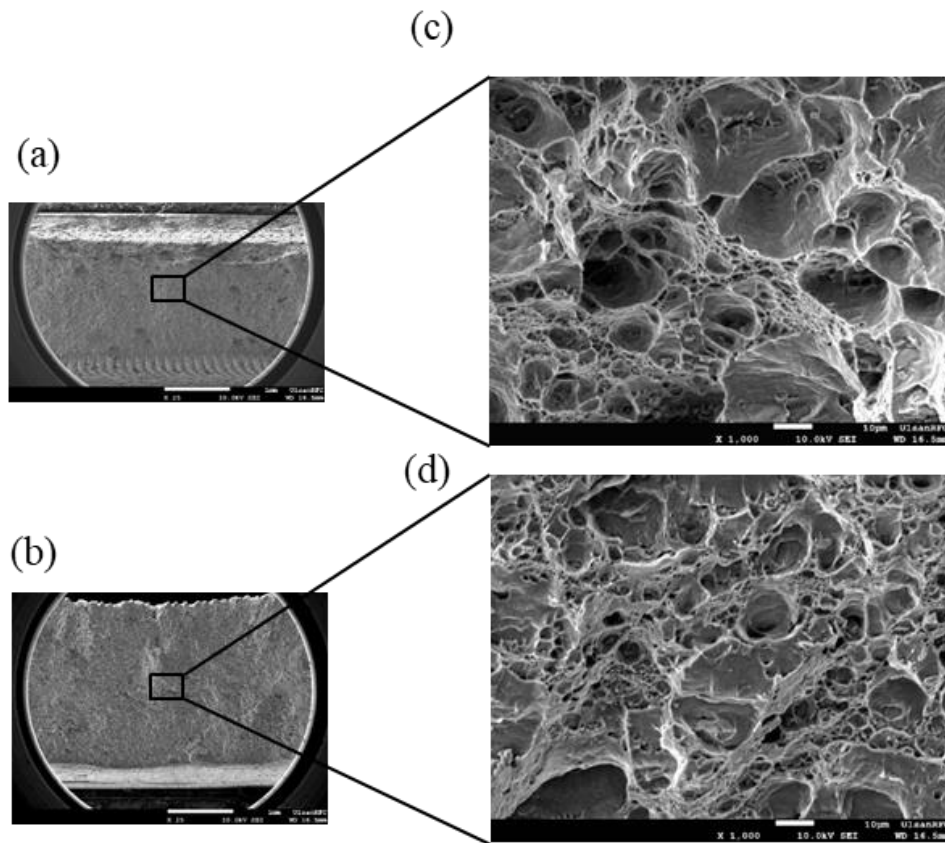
(a, b) SEM fractography of the fractured tensile specimens in the FSW and the PWHT joints; (c, d) magnified views of the areas in (a) and (b) that are indicated by black rectangles.
